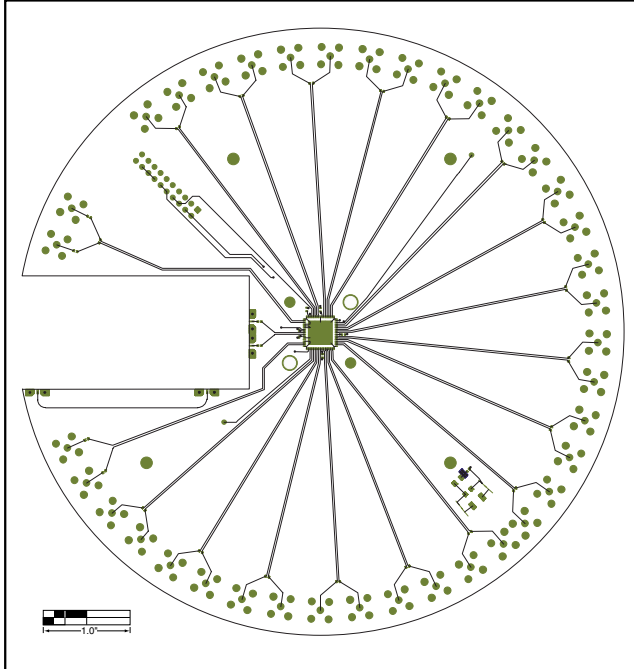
MAX3953 EV Kit PC Board Layout—Component Side
